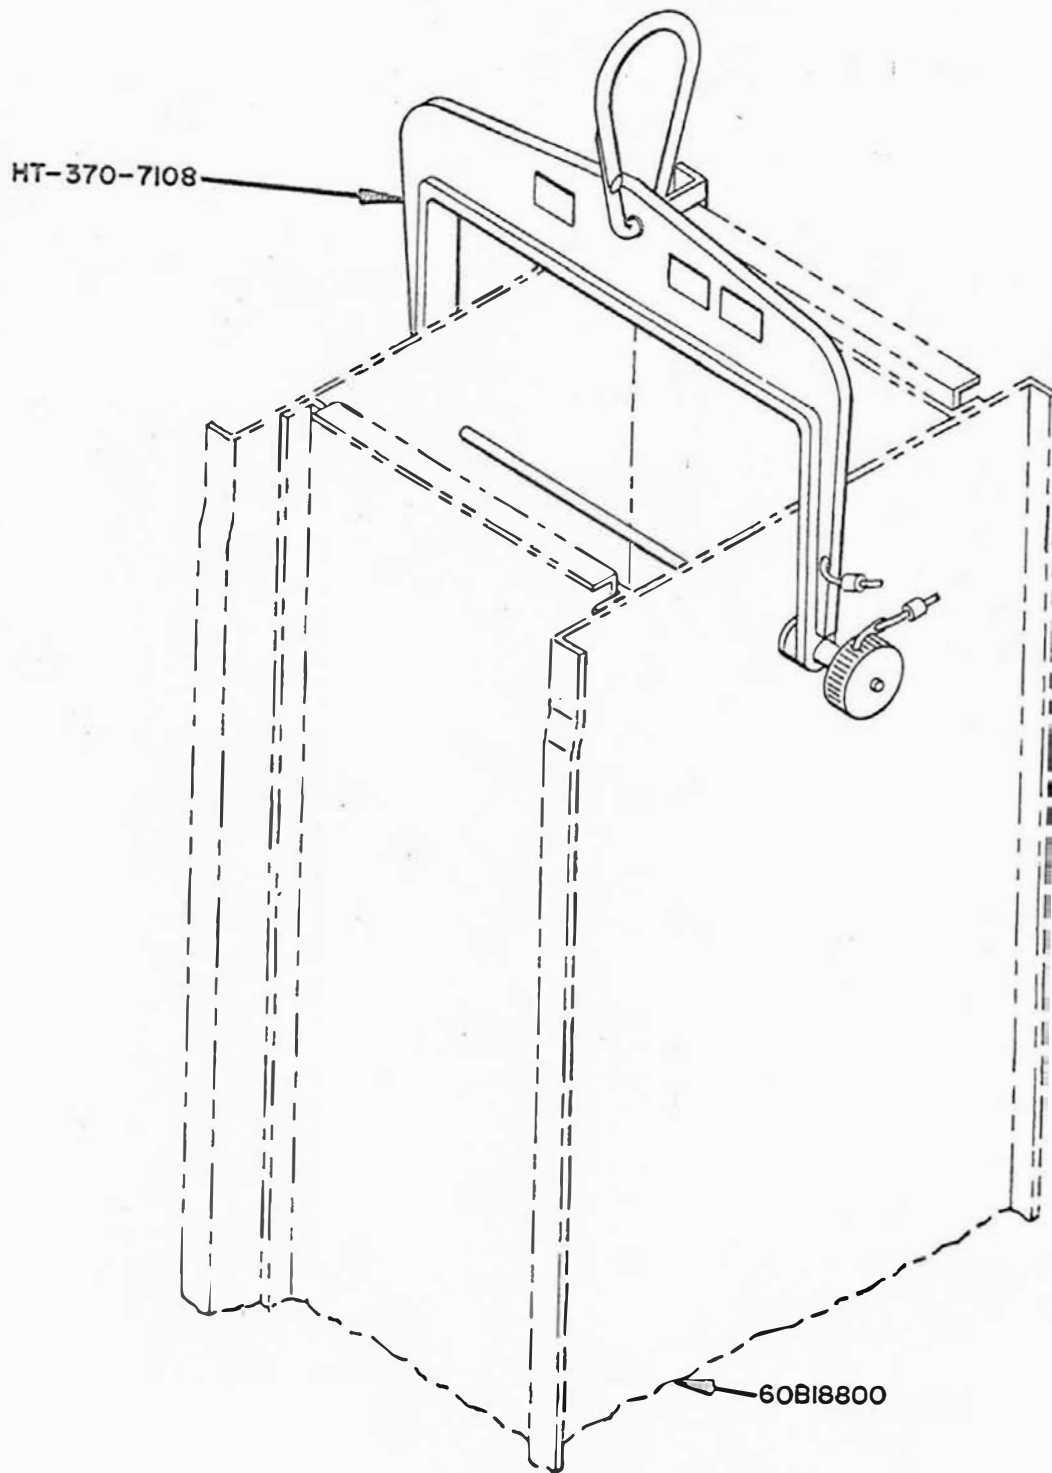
Outboard Thrust Post Assembly Hoisting Tool HT-370-7108
